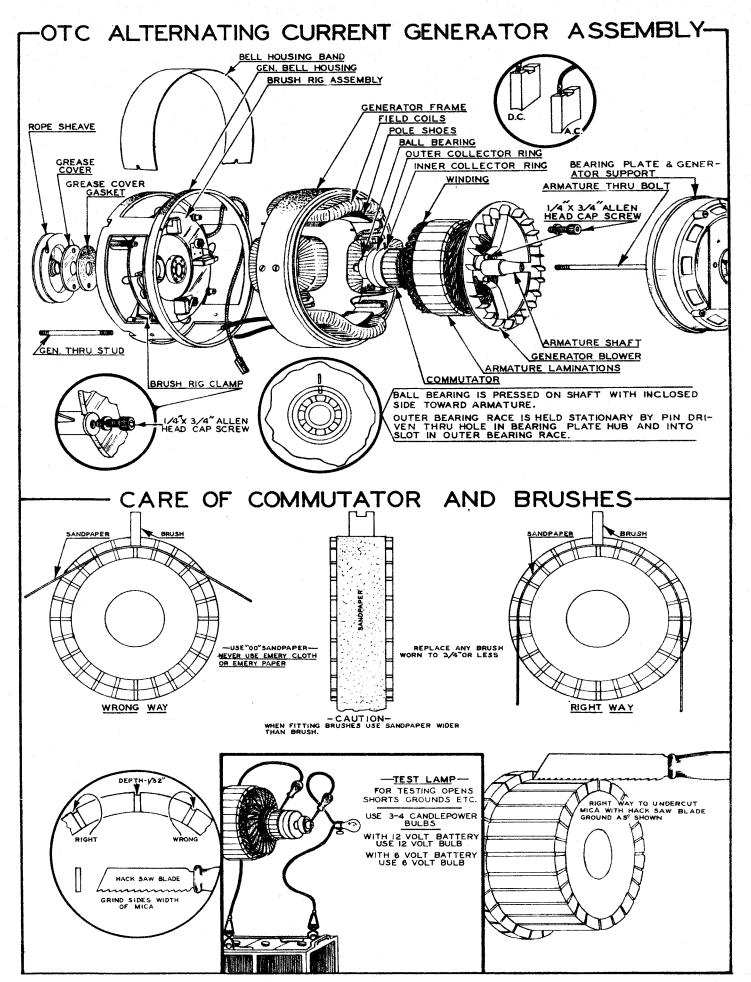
Generator Assembly and Care of Commutator and Brushes, Generator Type CD0-21647, a part of Engine Generator Set Type CD0-73004-A.
